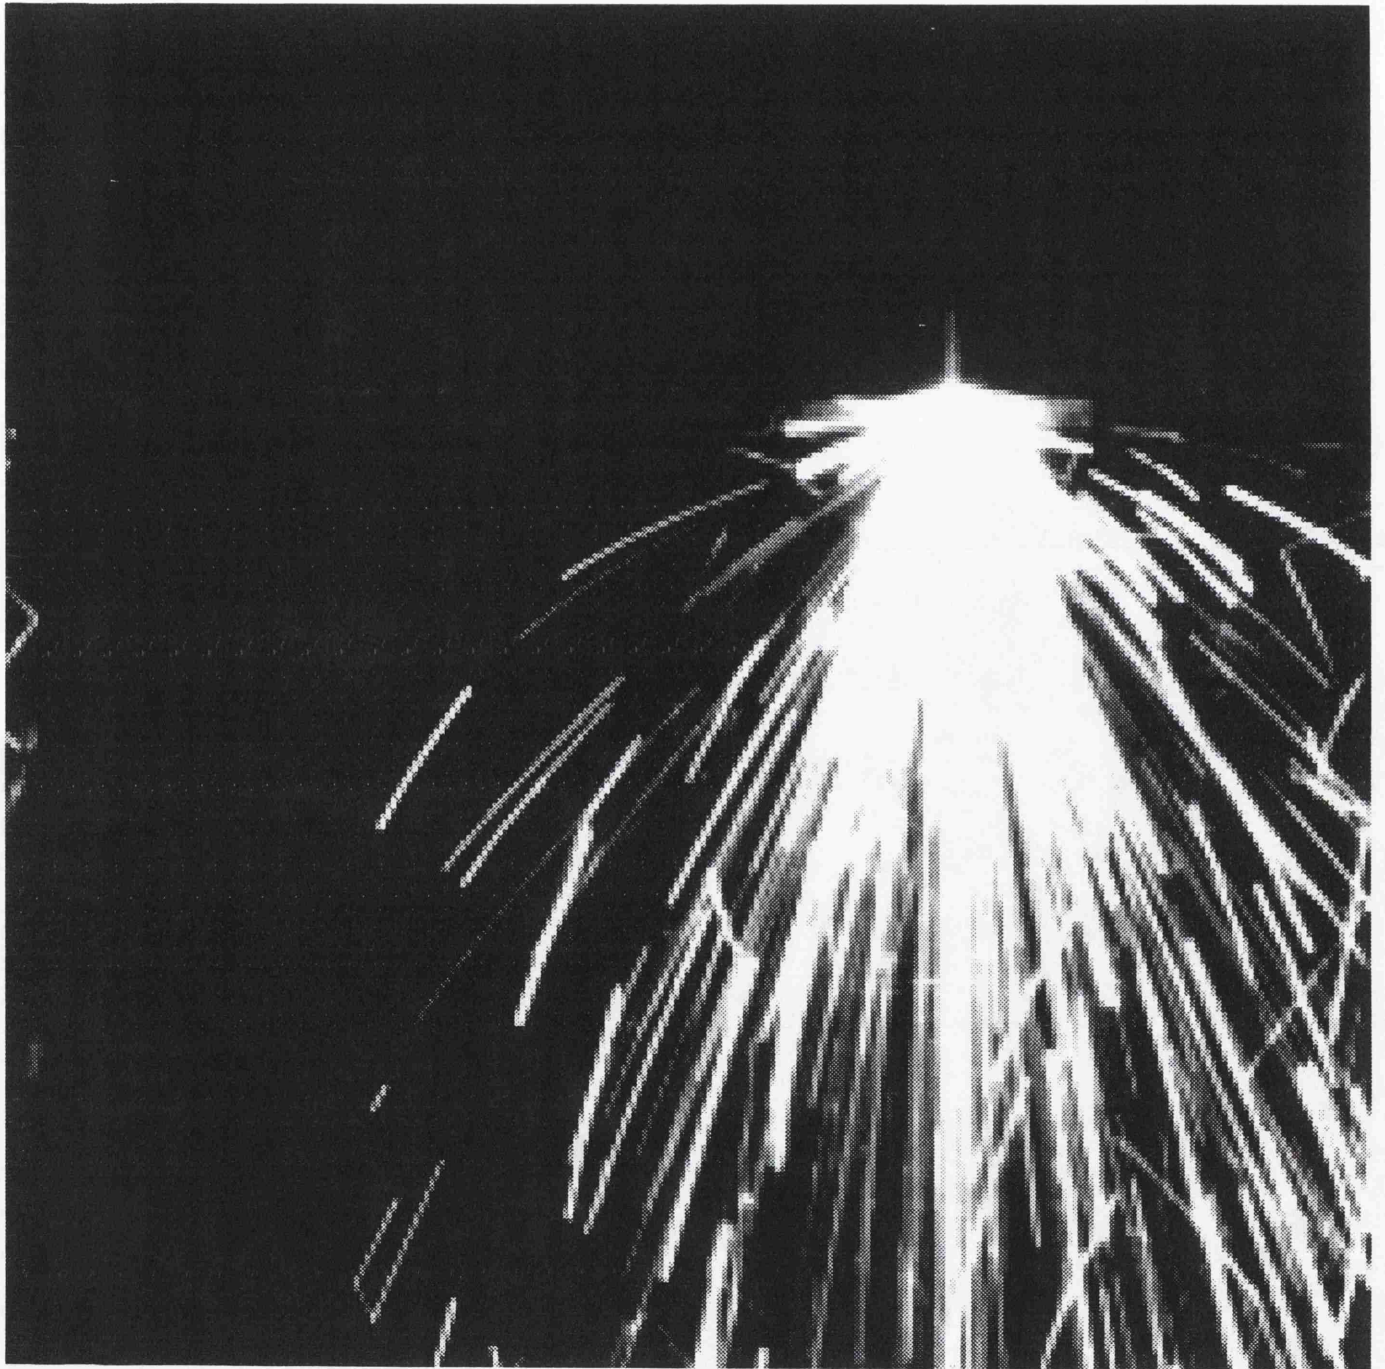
Spark Cone Image of 4 mm Mild Steel Cutting Process With
